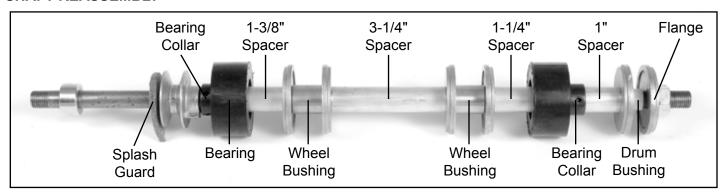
Diamond wheel shaft assembly (shown without diamond wheels and polishing drum)
